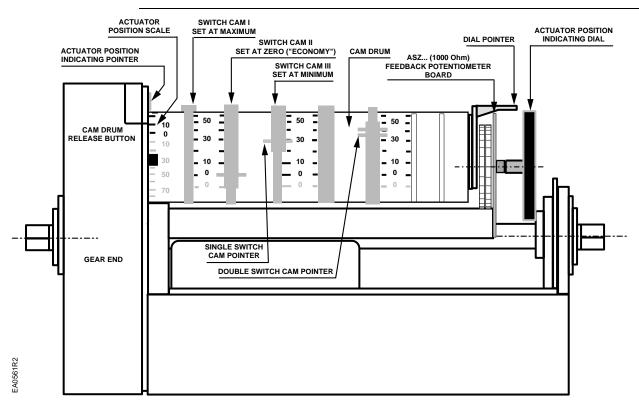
Component Identification on the Cam Drum Side of the SQM5... Actuator.
